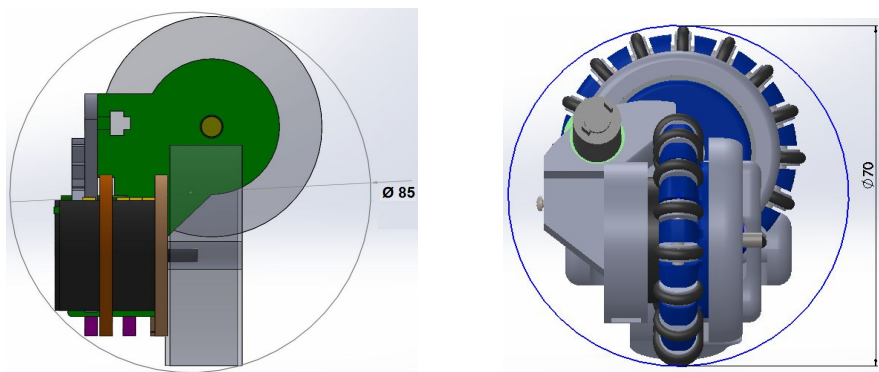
Old design (left) and new design (right) of the omniwheel robot for in-pipe inspection, both shown in their smallest configuration inside a pipe.
